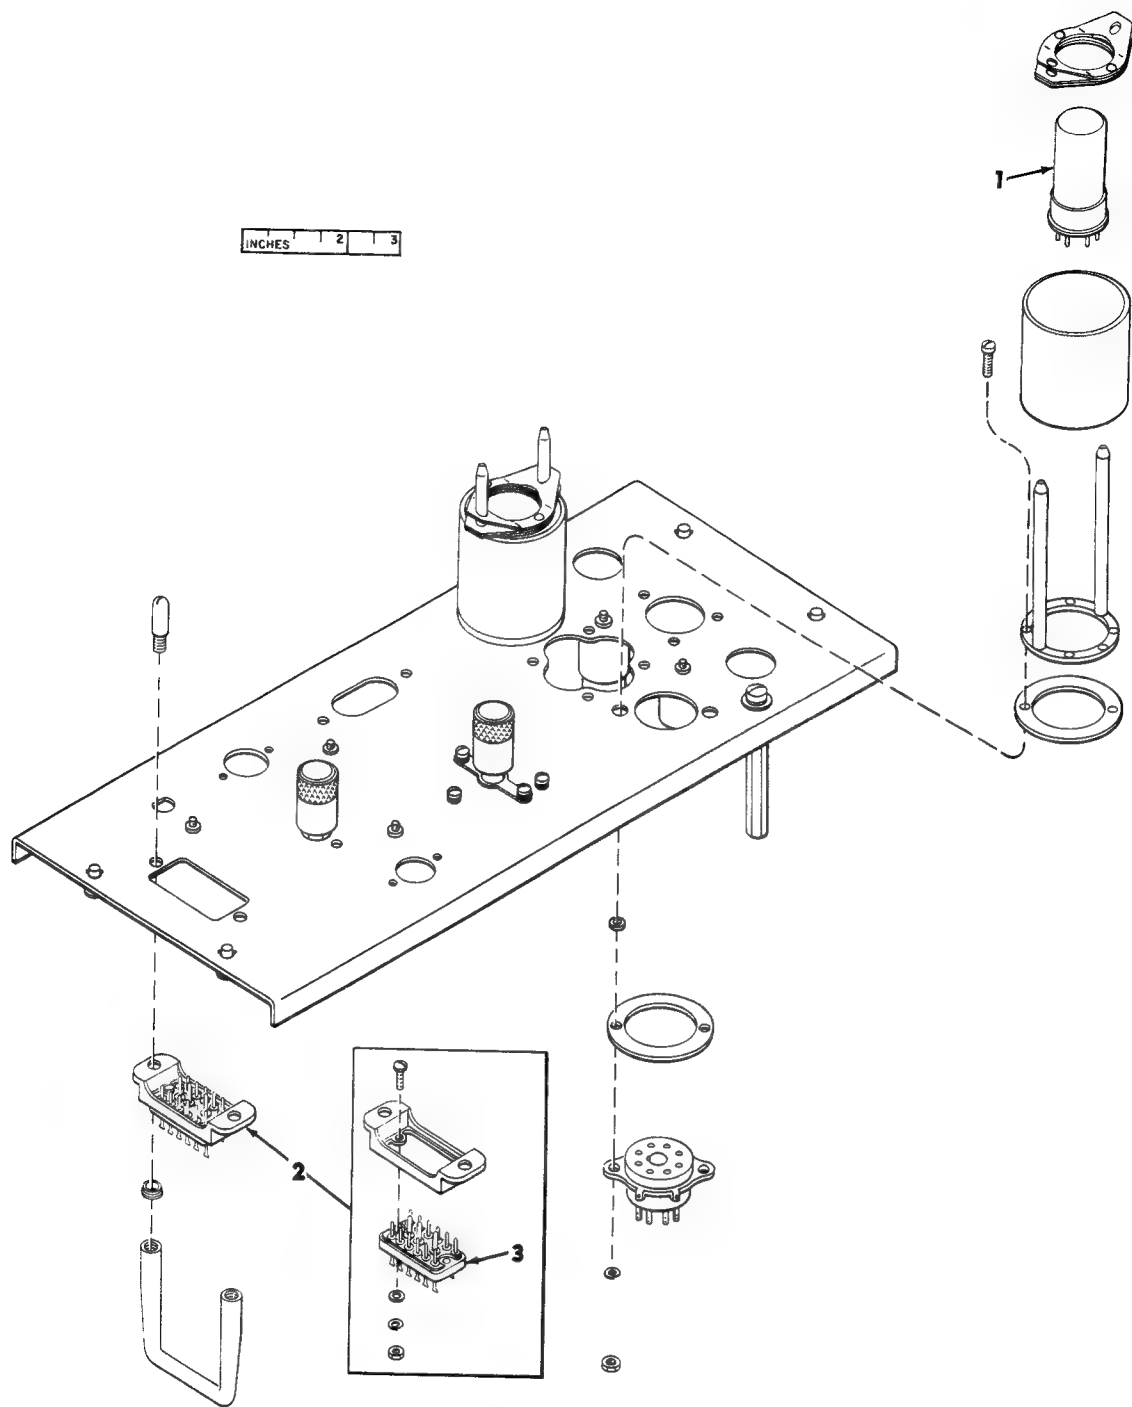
Generator, pulse O-304/M (8007726)--partial exploded view
